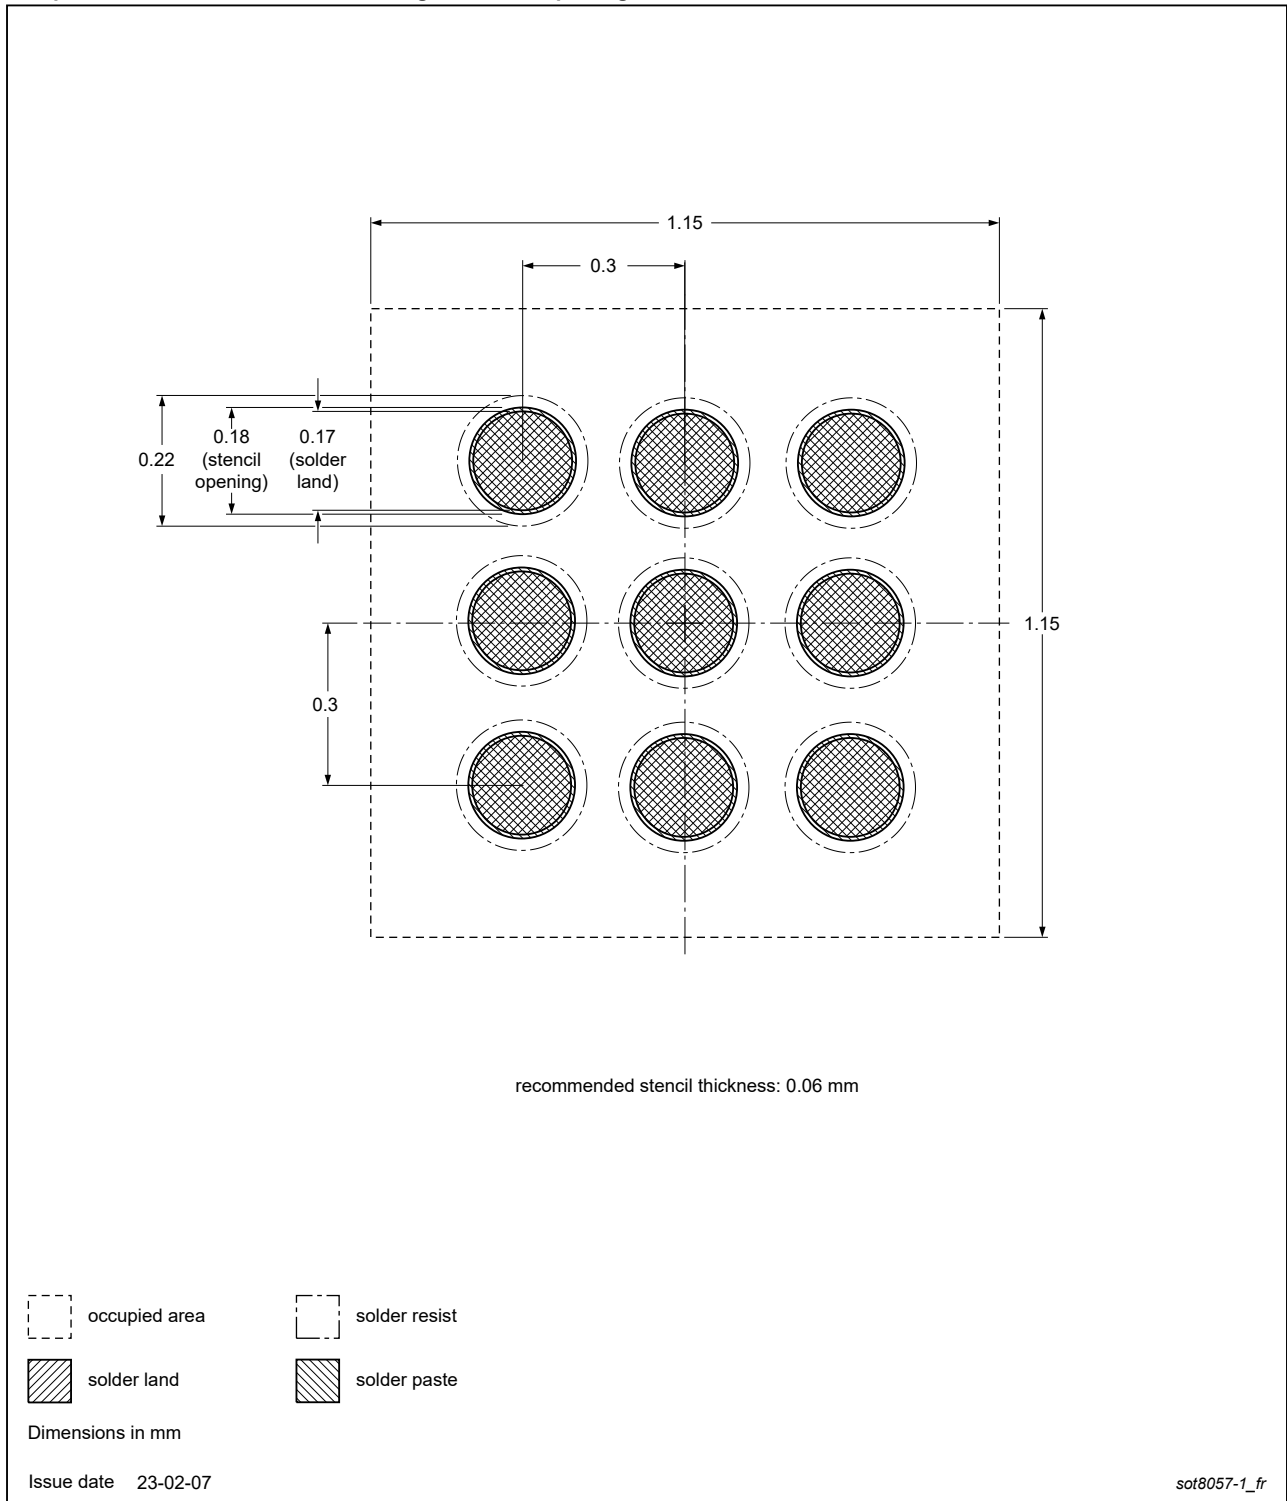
Reflow soldering footprint SOT8057-1 (WLCSP9)
